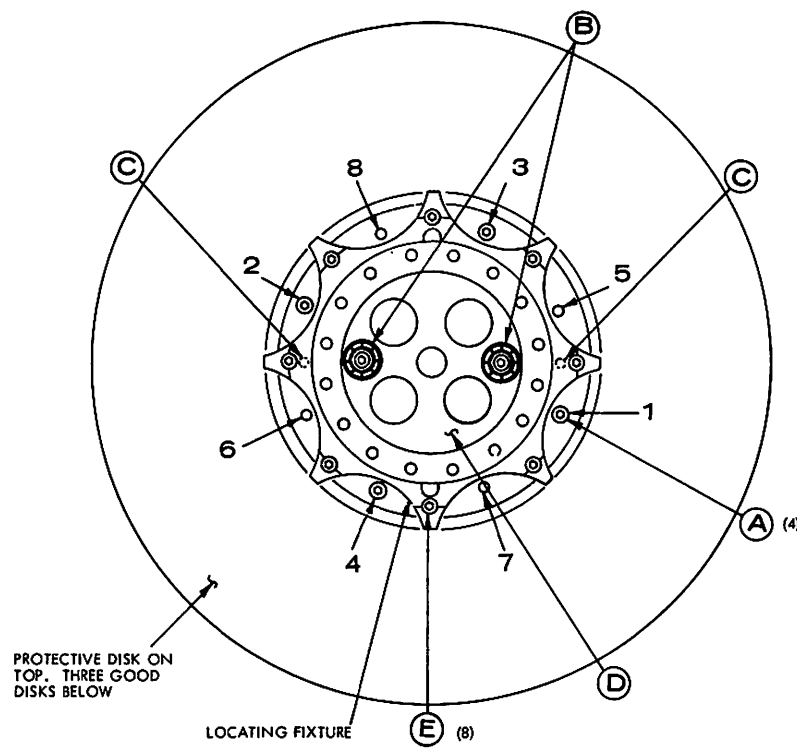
REMOVAL OF RECEIVER PLATE ASSEMBLY AND FIXED DISK PACK
